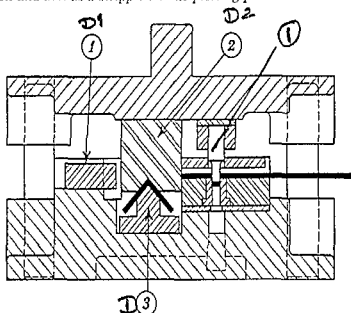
Progressive forming die with shear-type cutoff.³
